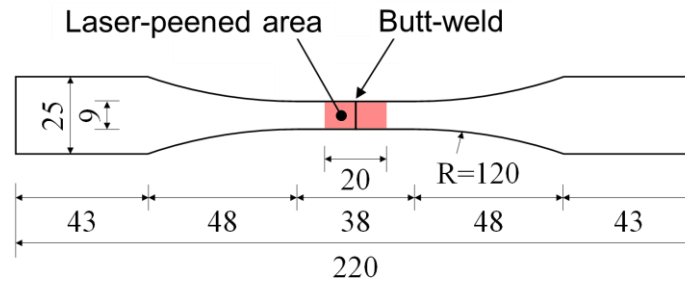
HT780 butt-welded joint sample for fatigue testing.
